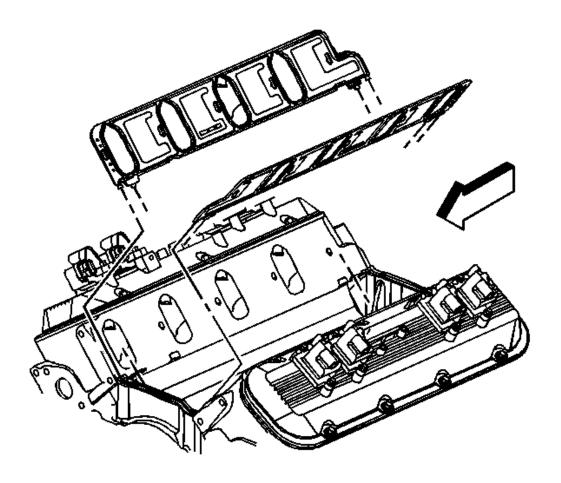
View Of Intake Manifold Side Gaskets Courtesy of GENERAL MOTORS CORP.
